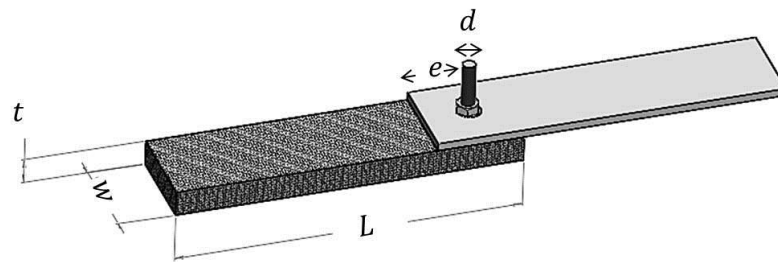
2 Single lap bolted specimen showing the relevant joint dimensions.
